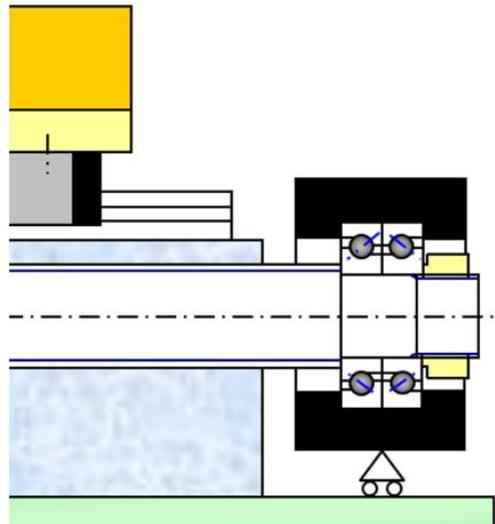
Mechanical configuration of measured side in preliminary tests assessing screw shaft elongation.
